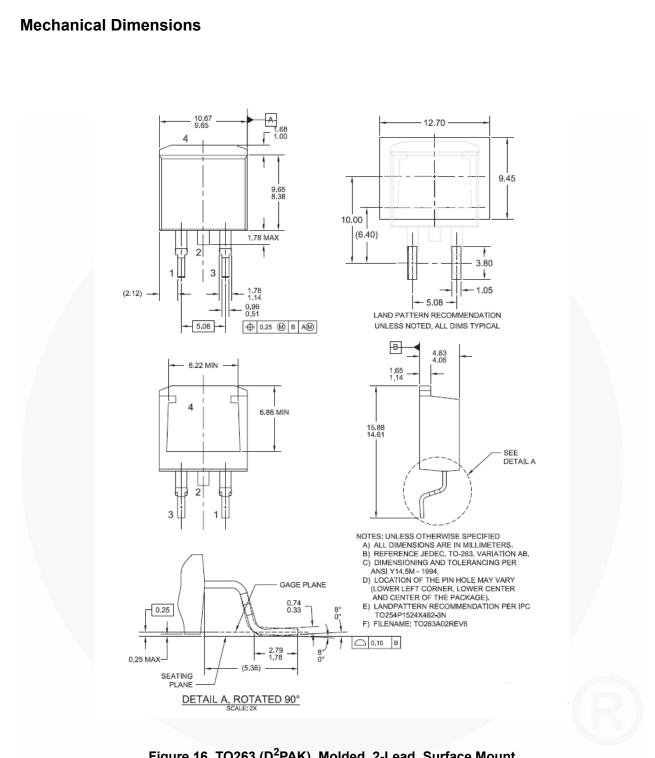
TO263 (D²PAK), Molded, 2-Lead, Surface Mount
